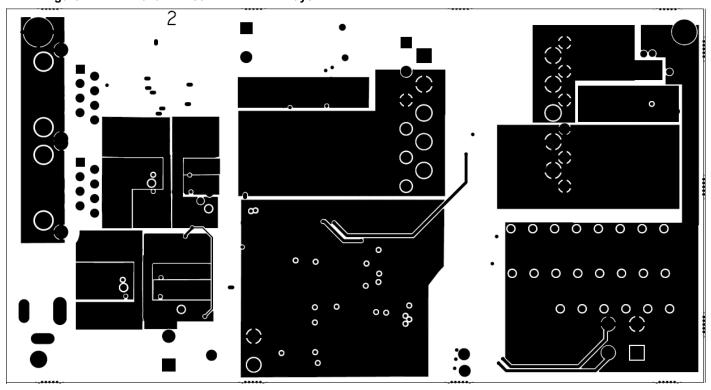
PD70201EVB60F12 EVB PCB Layer 3
